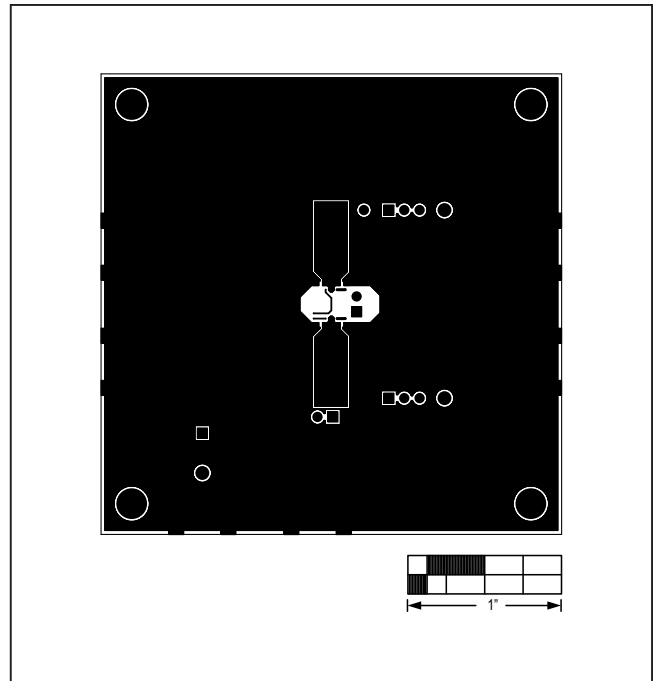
MAX44205 EV Kit PCB Layout—Solder Side
